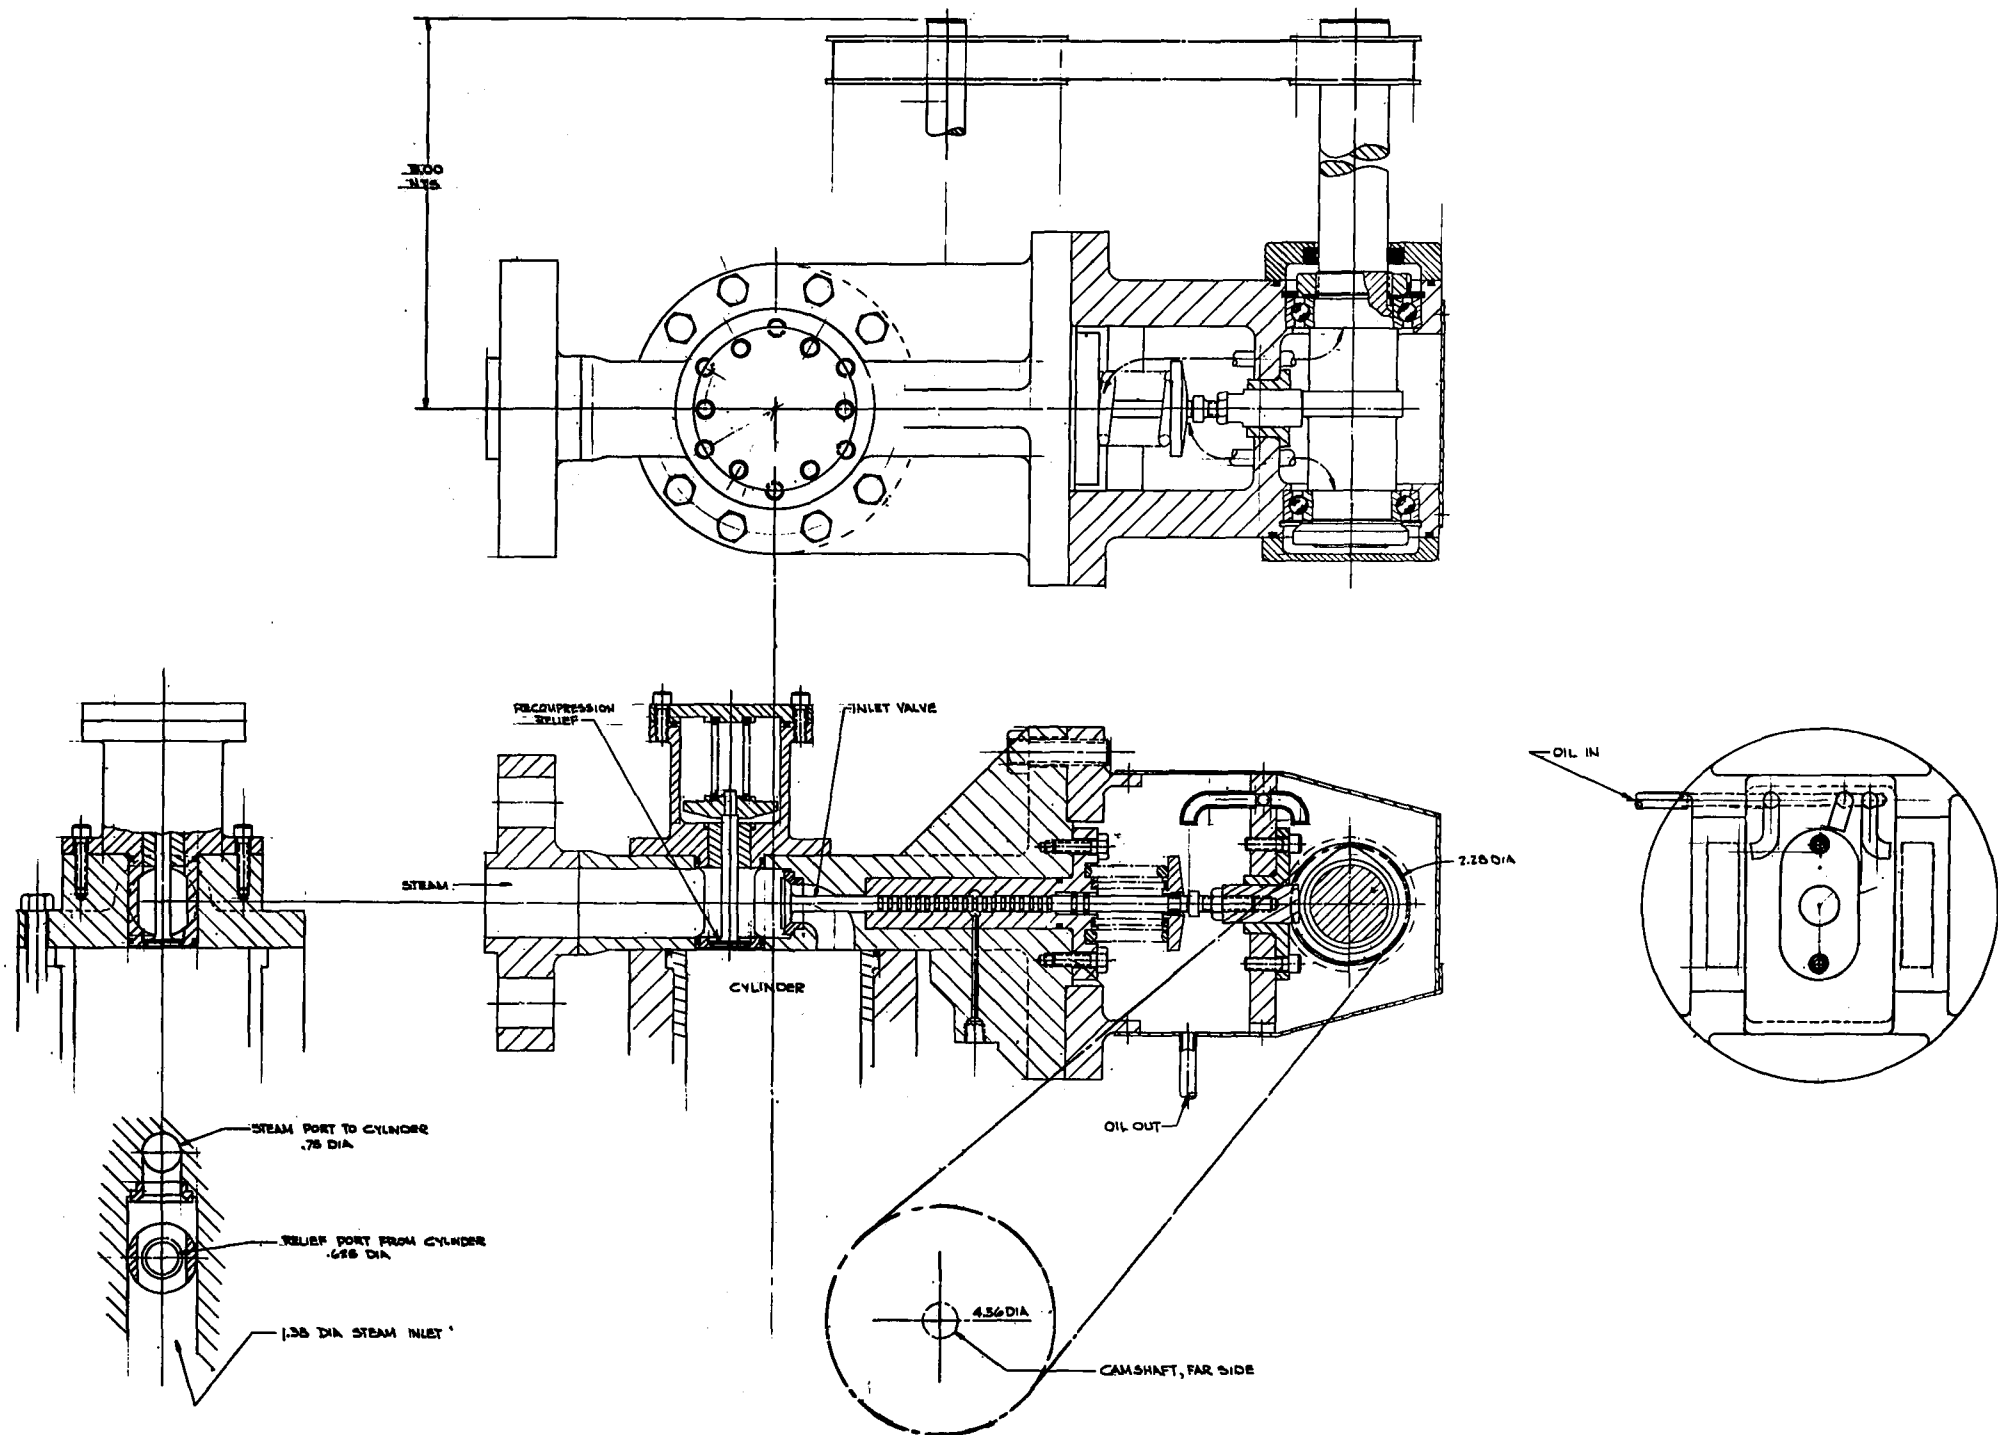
Cam Shaft Drive, Head, Valve, and Cam Details (GE Dwg. 707E702).
